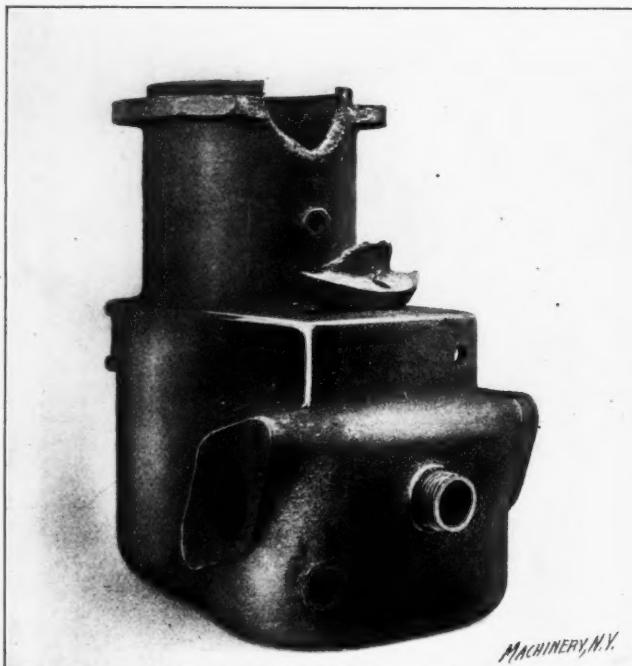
Broken Cylinder to be repaired by Autogenous Welding.
